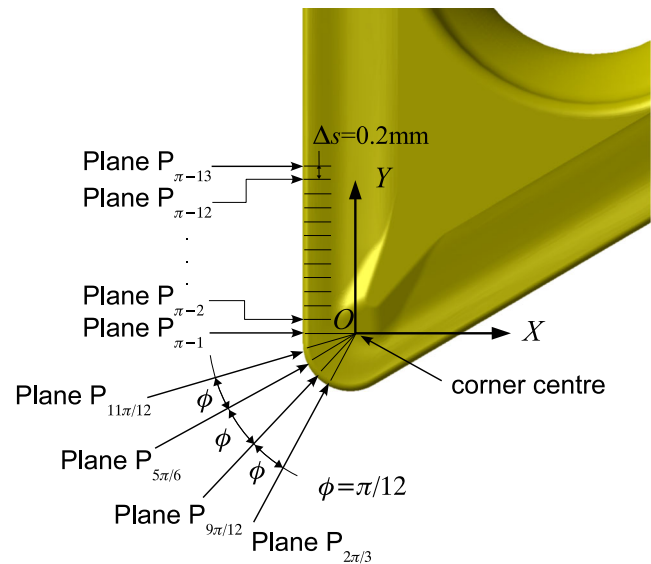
Three-dimensional cutting tool and defined cutting planes from which sketches are extracted
